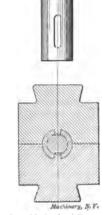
Holes Punched by Punches Fig. 83. Method of Forging the Integral with Die Slots in Collets
